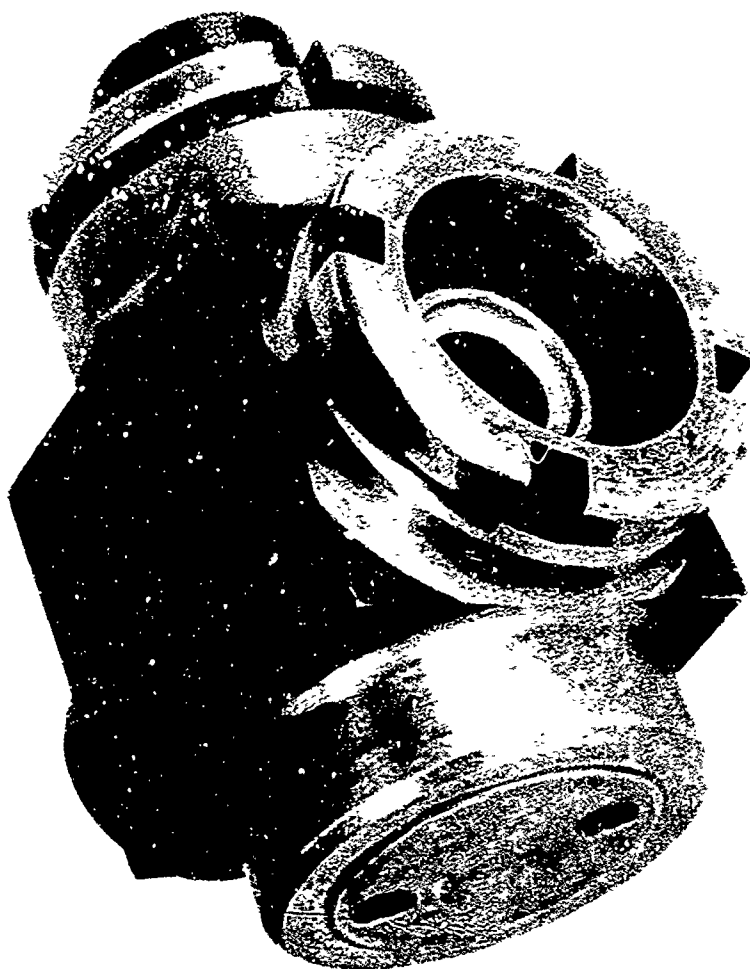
, 3-5. Test Fixture No. 2 - Assembly
